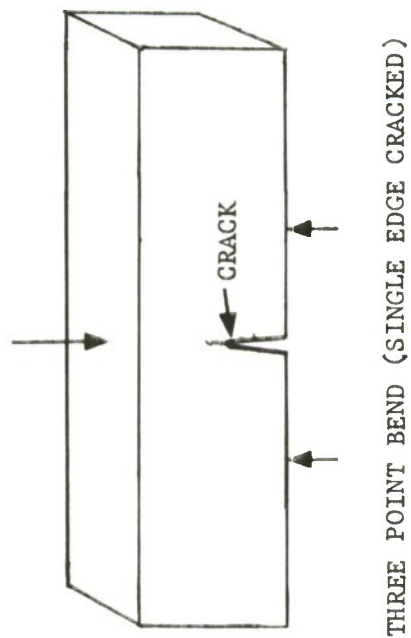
FRACTURE TOUGHNESS TEST SPECIMENS
